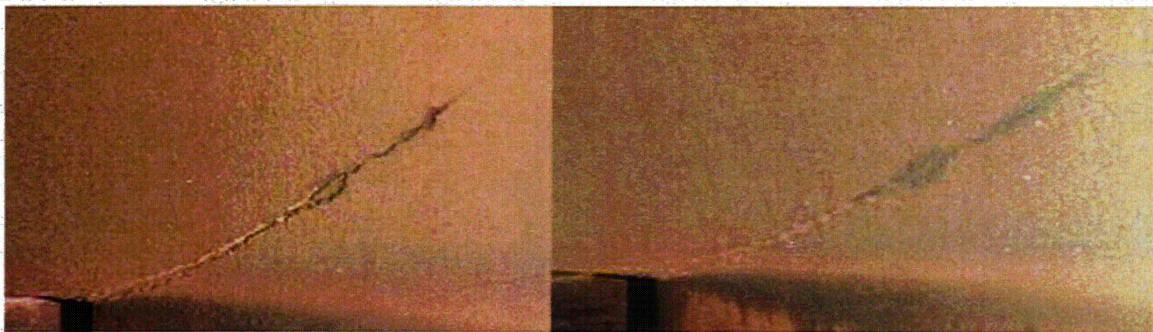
Mechanical Fatigue Crack Made Visible by Disturbance in Loose Oxide Layer
